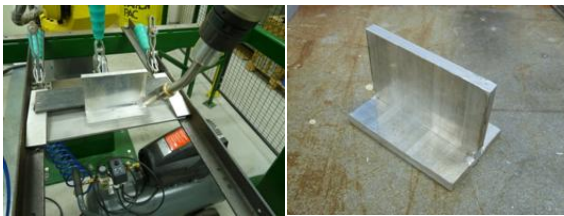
Experimental setup and picture of sample with stitch welds
